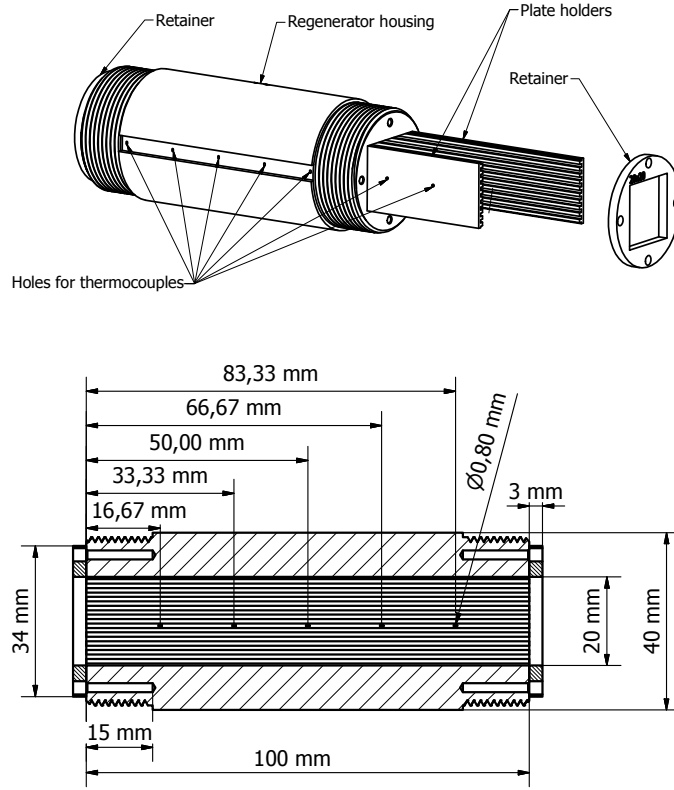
Geometry, dimensions, and assembly of the regenerator components used in the passive regenerator experiments.
